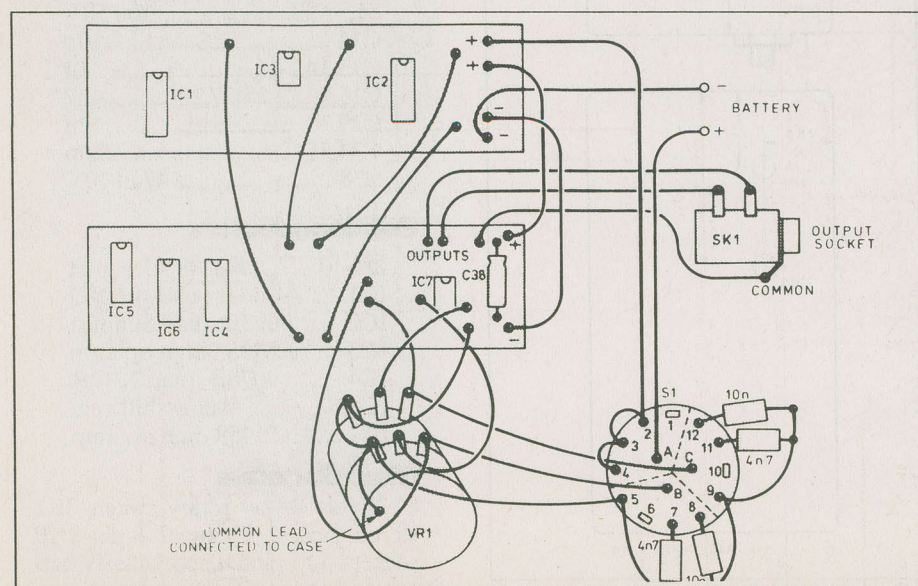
Interwiring to the boards, VR1, JK1 and S1.
